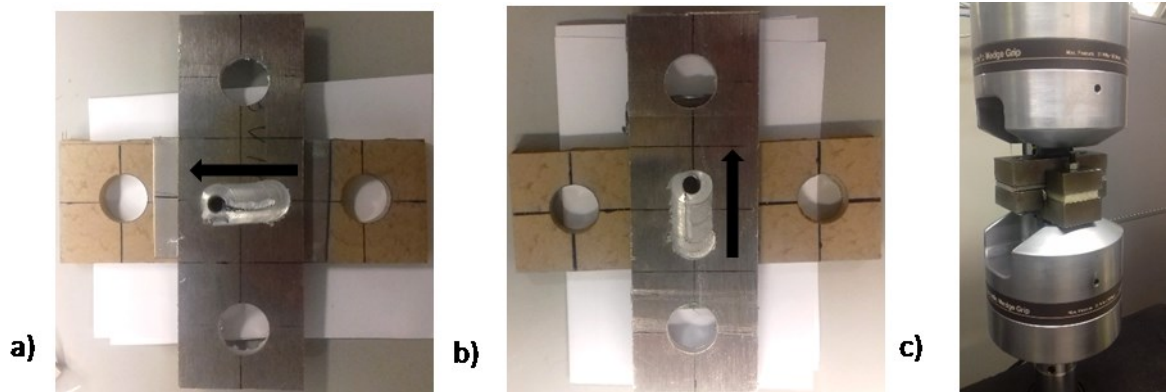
Cross-Tension Test Specimen a) Transverse Weld, b) Longitudinal Weld, c) Specimen in the Test Machine
